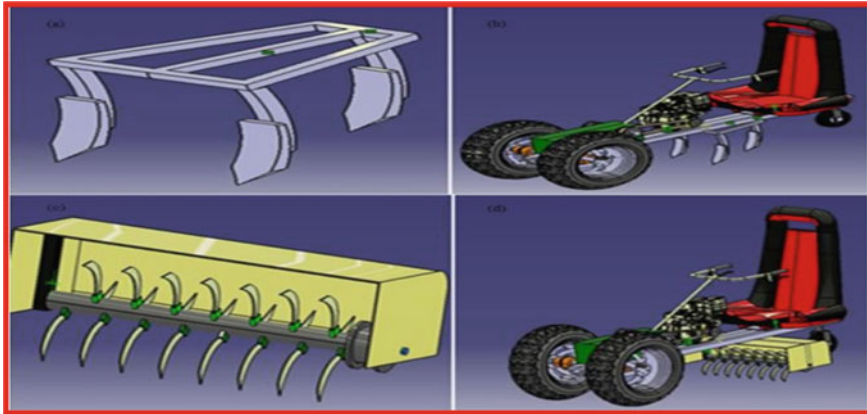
Three-dimensional models of a Tiller model, b MTLAV with tiller attachment, c Plow assembly, and d MTLAV with plow attachment
